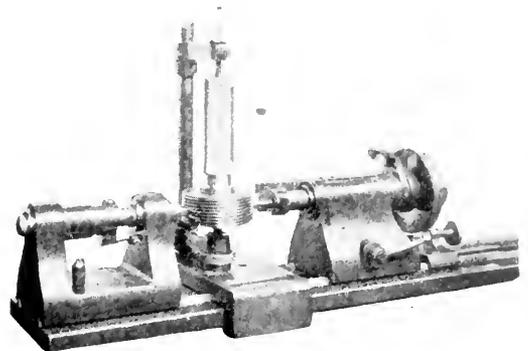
Machine for Measuring Thread Gauges Three-wire System
